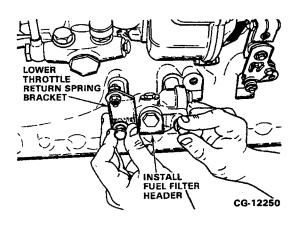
Install the Fuel Filter Header (Current Production Header Shown)
